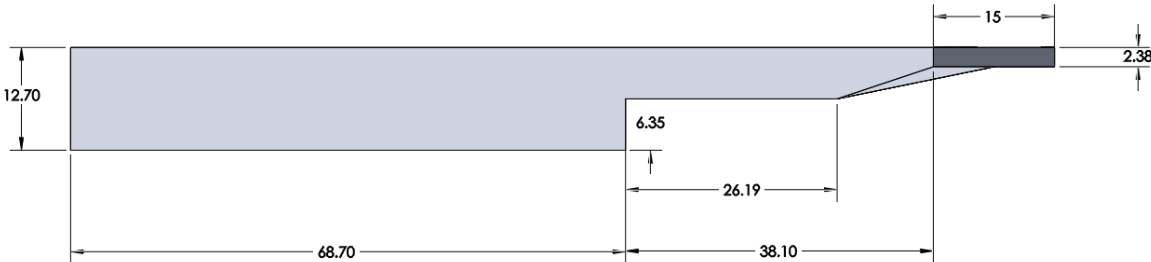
, Side view of serrated trailing edge (dimensions in mm).
